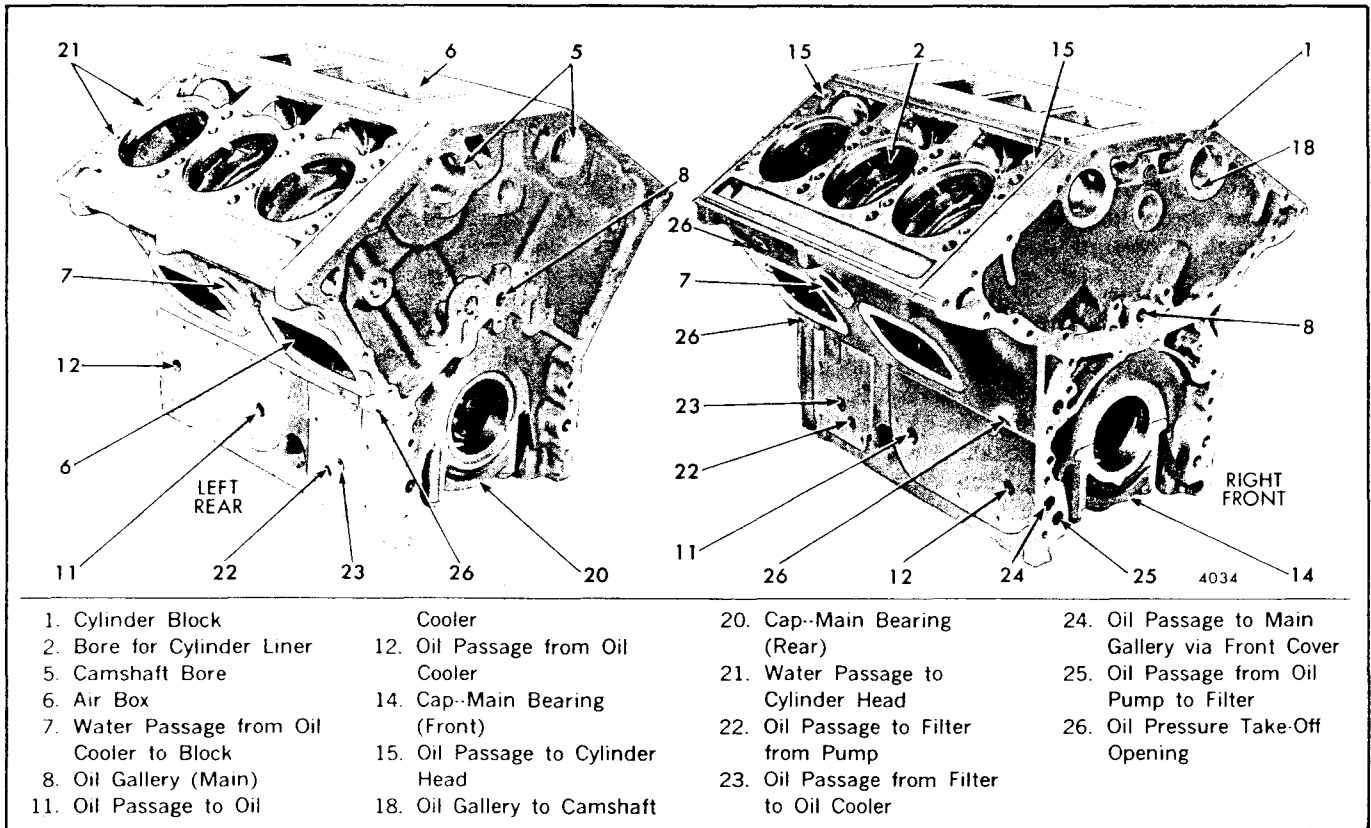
Cylinder Block (6V Cast Iron Cylinder Block Shown)
